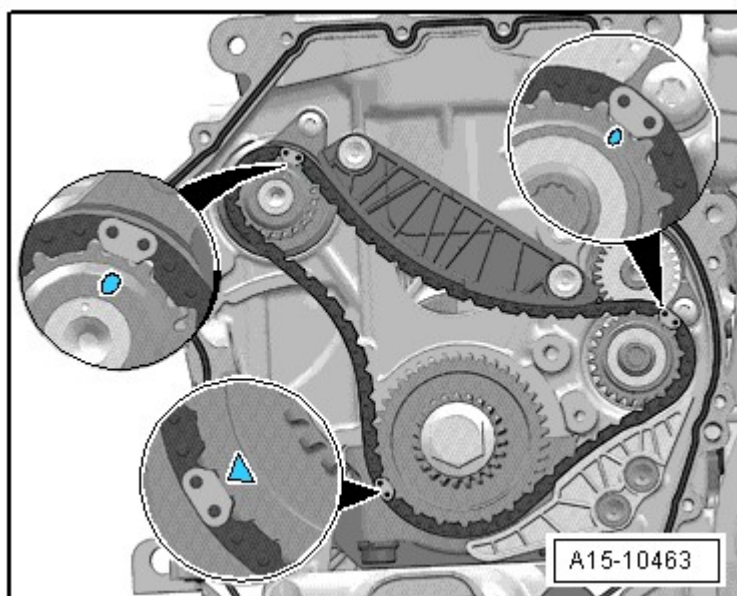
Identifying Balance Shaft Timing Chain, Tensioning Rail And Guide Rails
